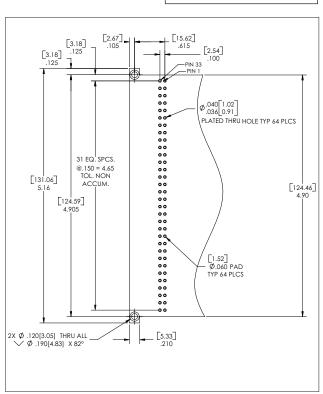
Figure B. Part # 510 104 187 Recommended Board Layout. Solder Side Shown.
